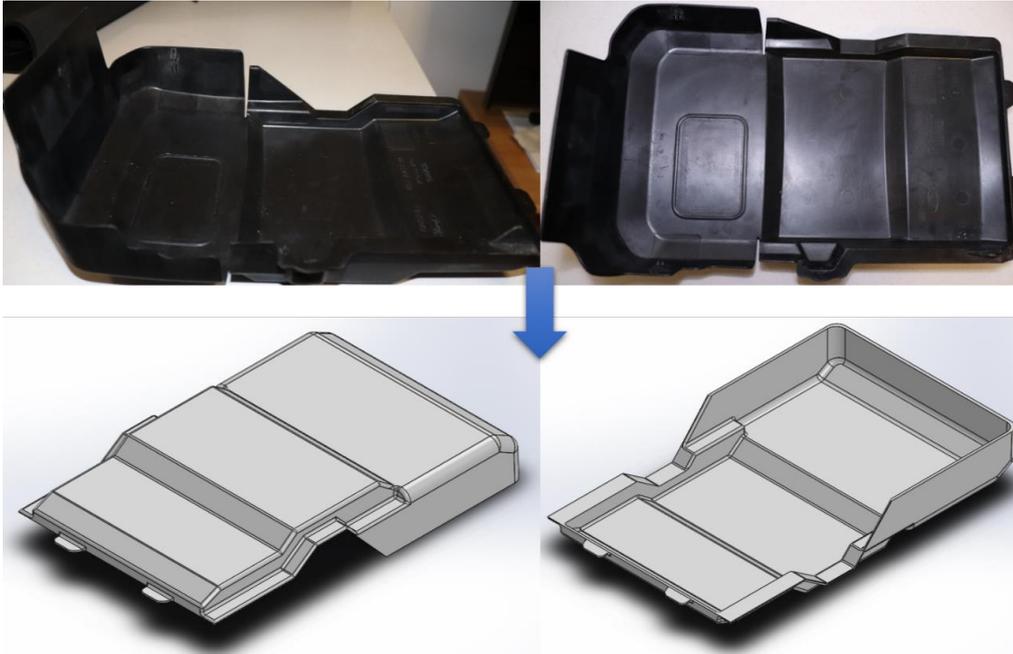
Original injection molded part (up) and newly designed compression molded part.
